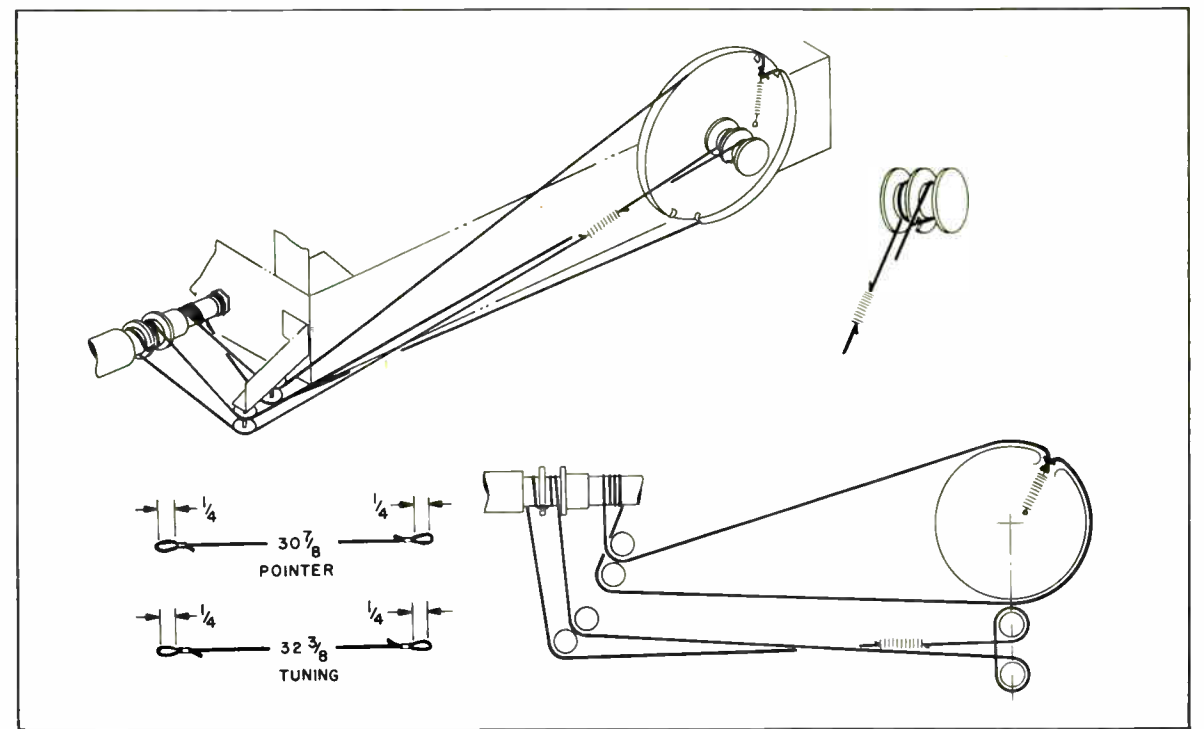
Drive Cord Installation Details for AM Radio Tuner RT-9
